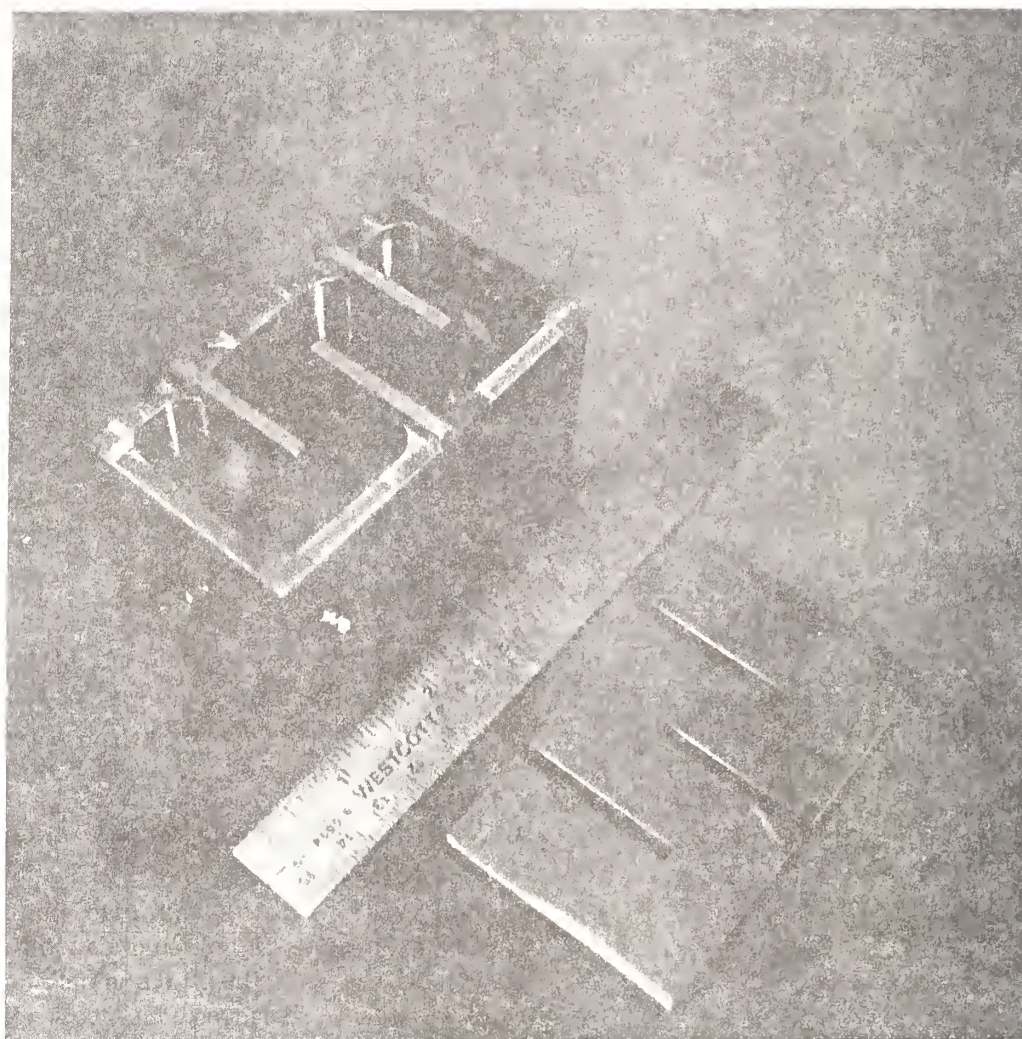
Photograph of the gas mixer showing the machined body and top before welding.
